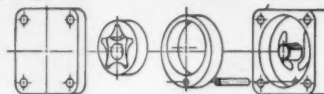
Three Gerotor components permit pump to be incorporated as integral part of housing or frame of mechanism, eliminate need for purchase and mounting of separate, complete pump.
